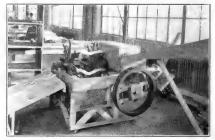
Pressure Leakage Testing Machine for Flexible Hose.
